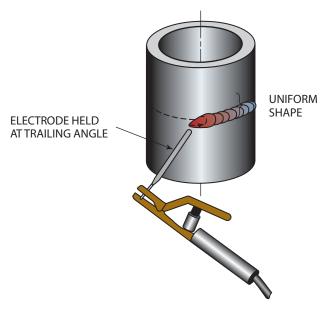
Electrode position and weave pattern for a weld on vertical pipe.
